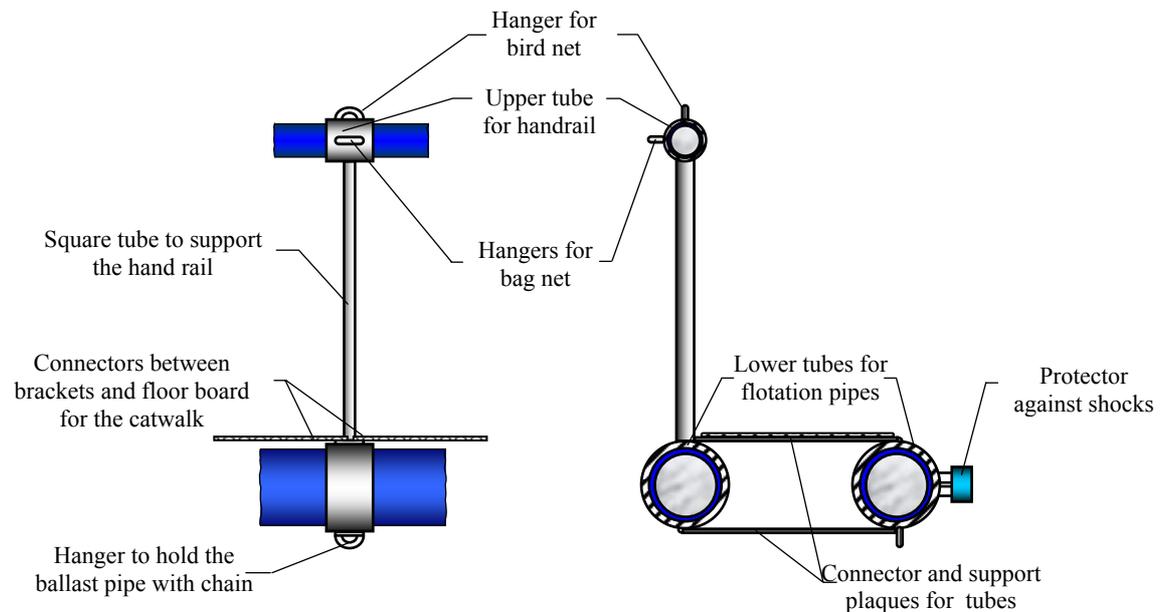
Brackets to hold the flotation and handrail pipes forming the structure of the cage and supporting the floorboards of the catwalk.
